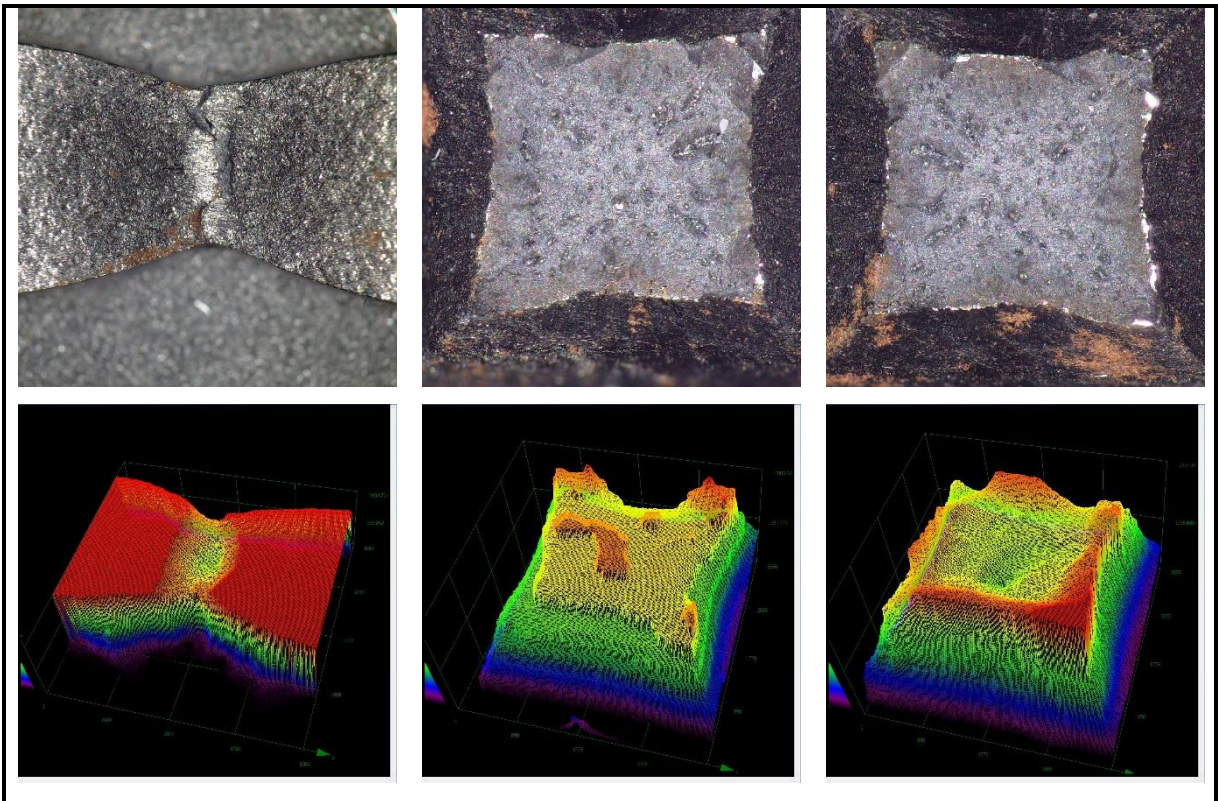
S3 test specimen fracture surface optical and height-contrast images
